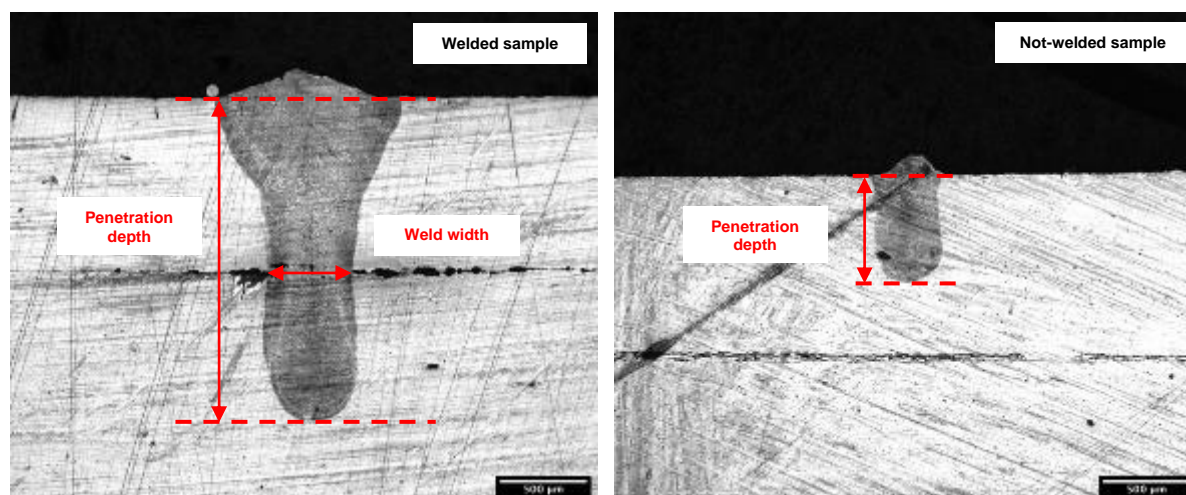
Measurement criteria for weld bead for welded (left) & not-welded sample (right)
